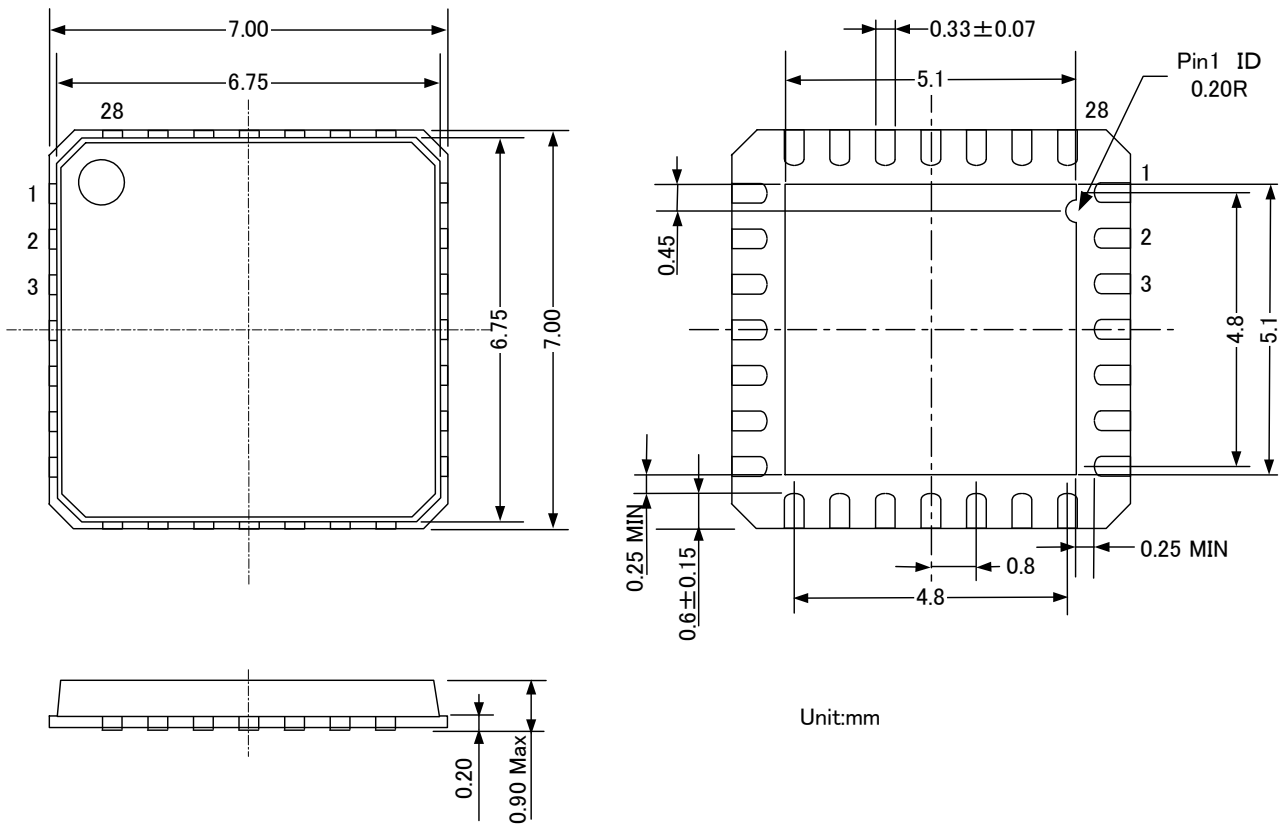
Package Outline ( Quad Flat No-Lead 28pin )
